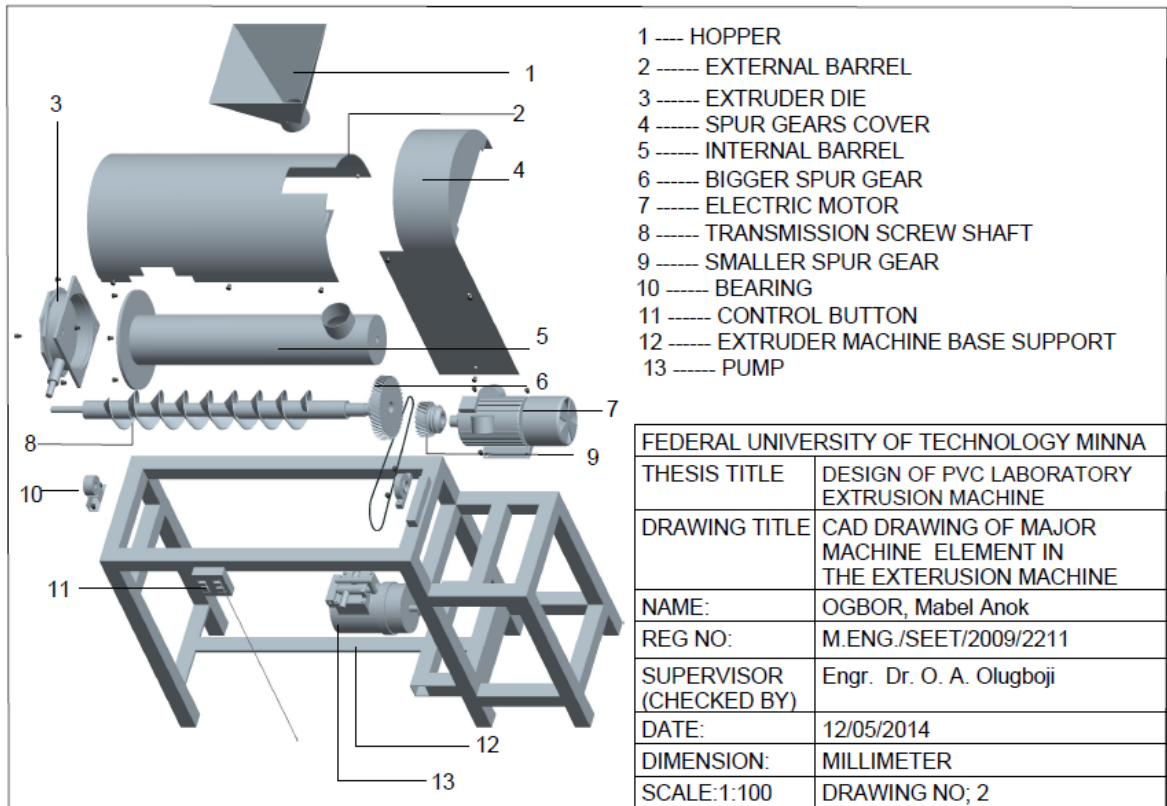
Figure VI: CAD Drawing of Major machine element in the Extrusion Machine
